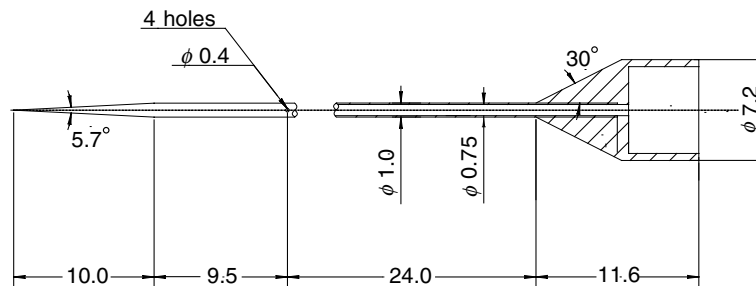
Schematic of the static pressure tube (dimensions in mm).
